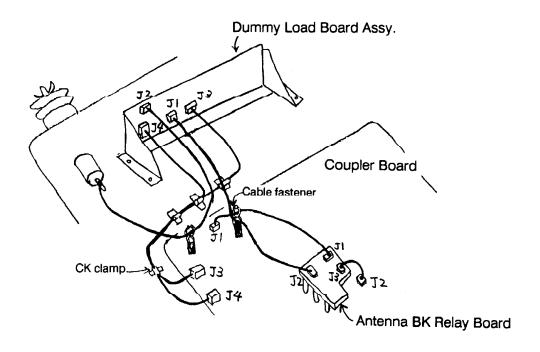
Wiring for Installation of BK and Dummy Load
